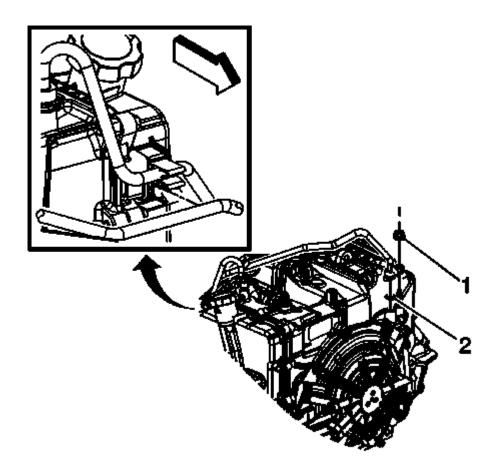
Identifying Wire Harness Retainer & TCM Electrical Connector Courtesy of GENERAL MOTORS COMPANY
